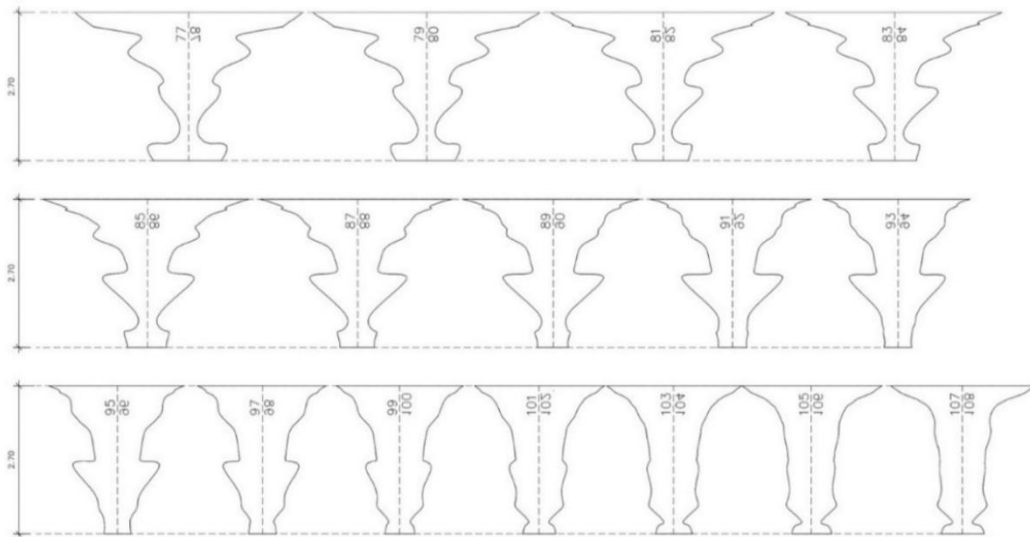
Technical drawing and numbering from a 3D model to send a 2D file to cut the material on a laser cutter or CNC machine.
